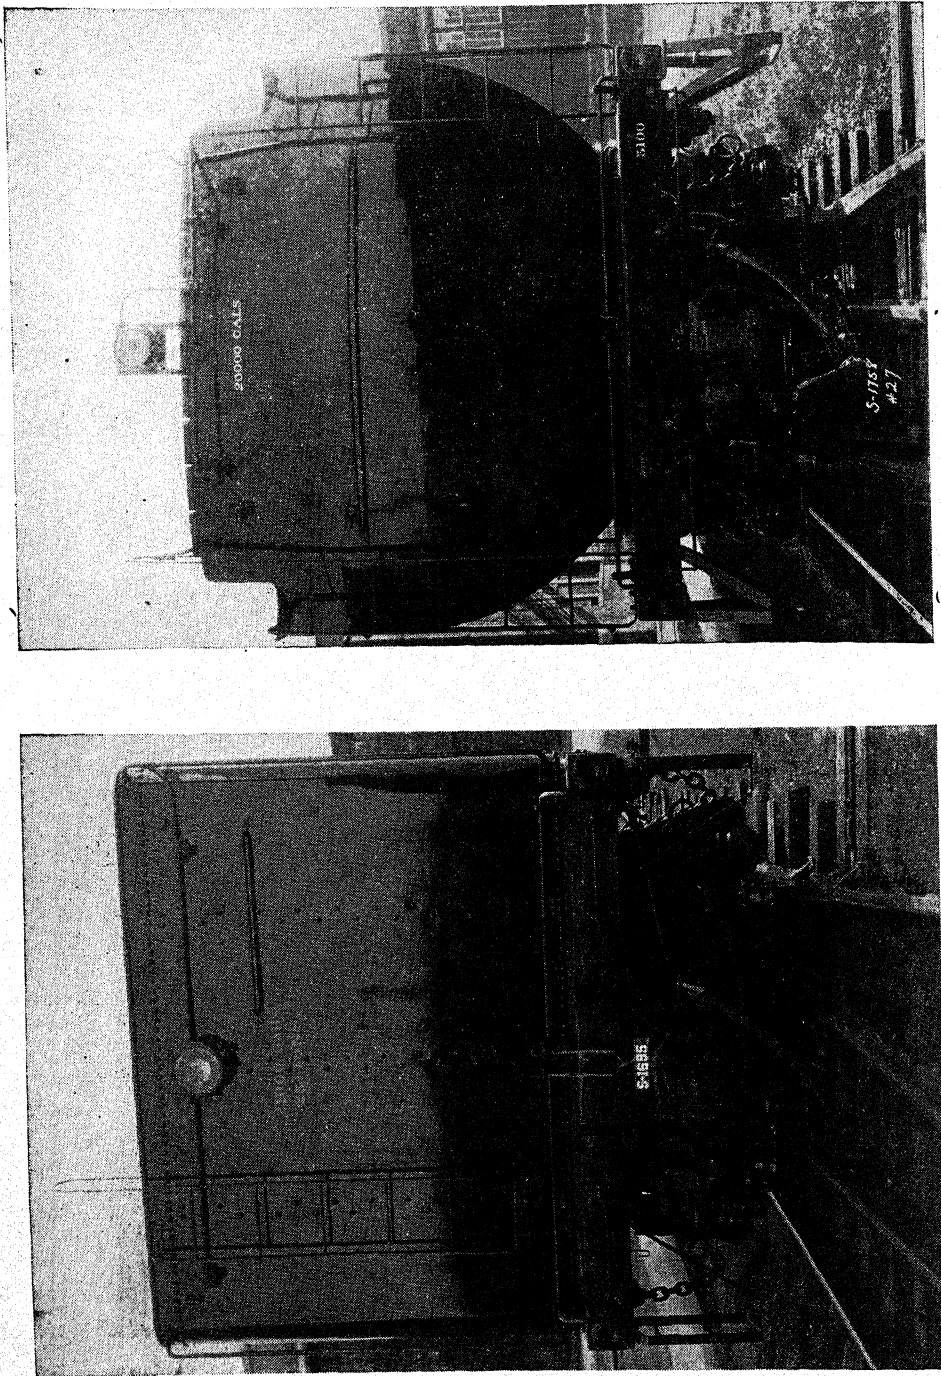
The old and the new locomotive tender tank. Compare appearance of riveted tank (left) with arc welded tank (right).
